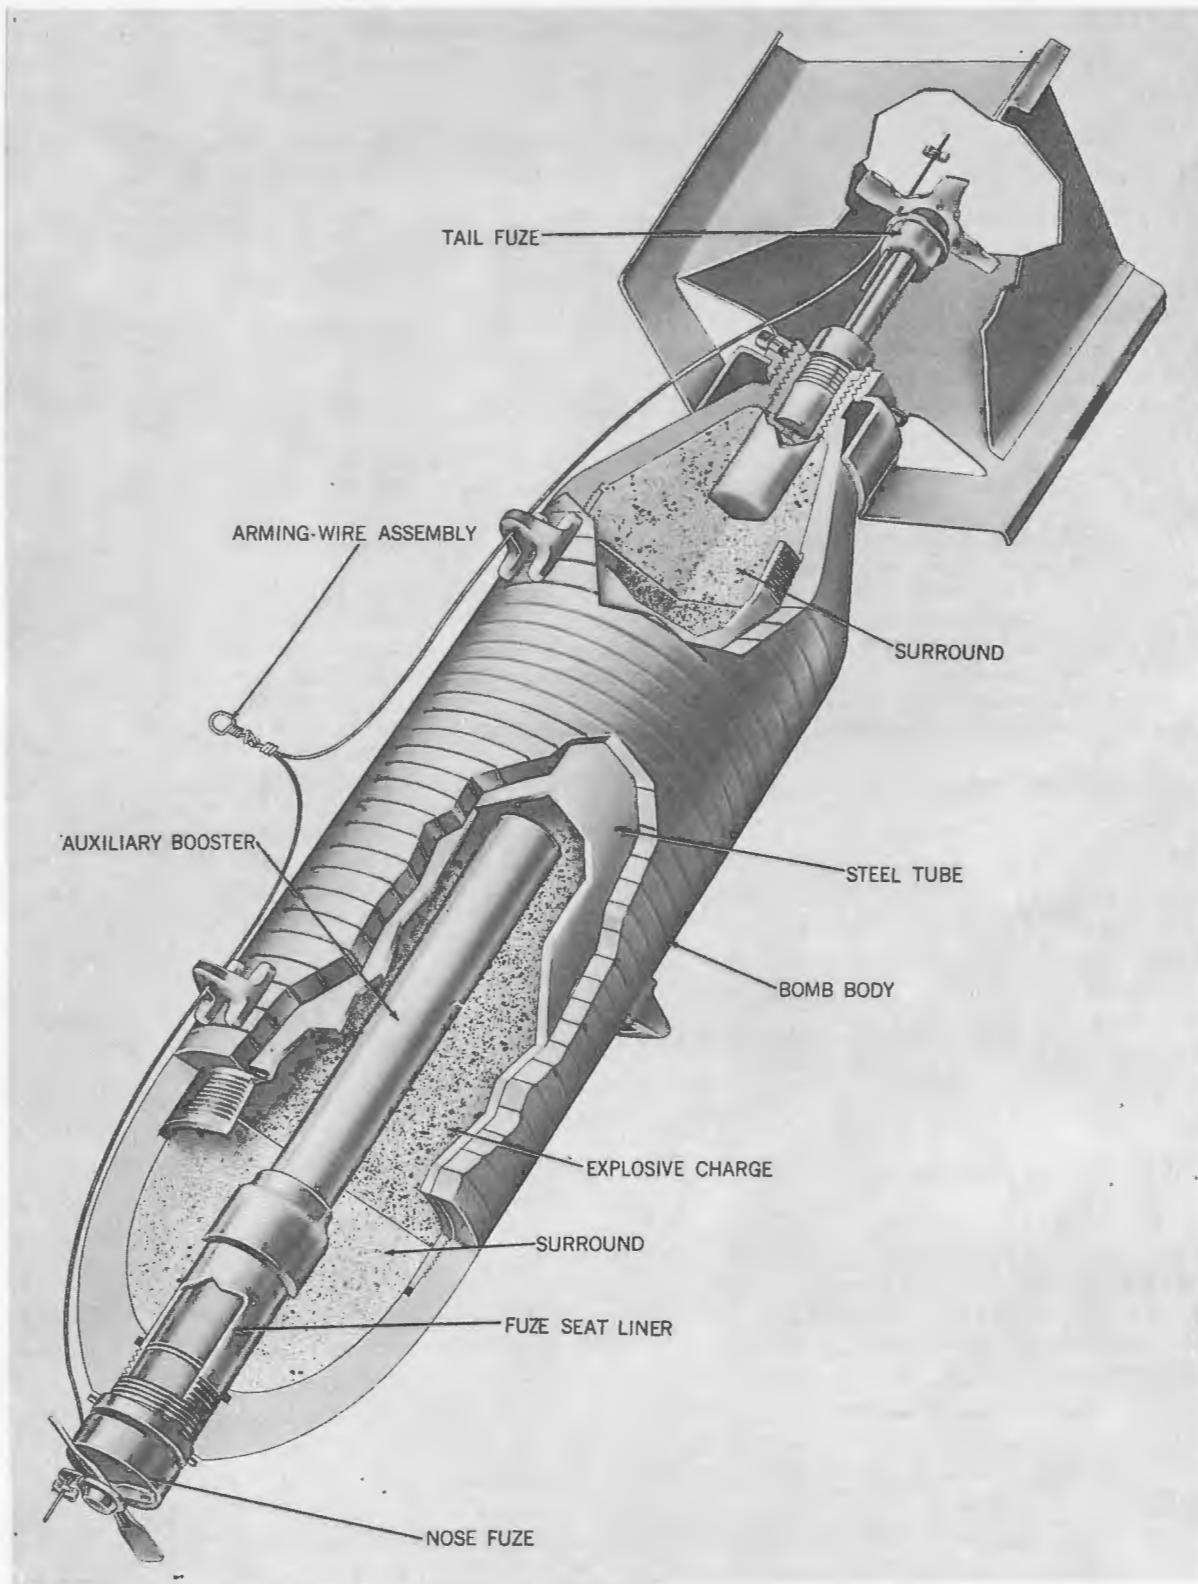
220-lb Frag Bomb AN-M88 with Fin Assembly AN-M103A1, Cutaway View.
